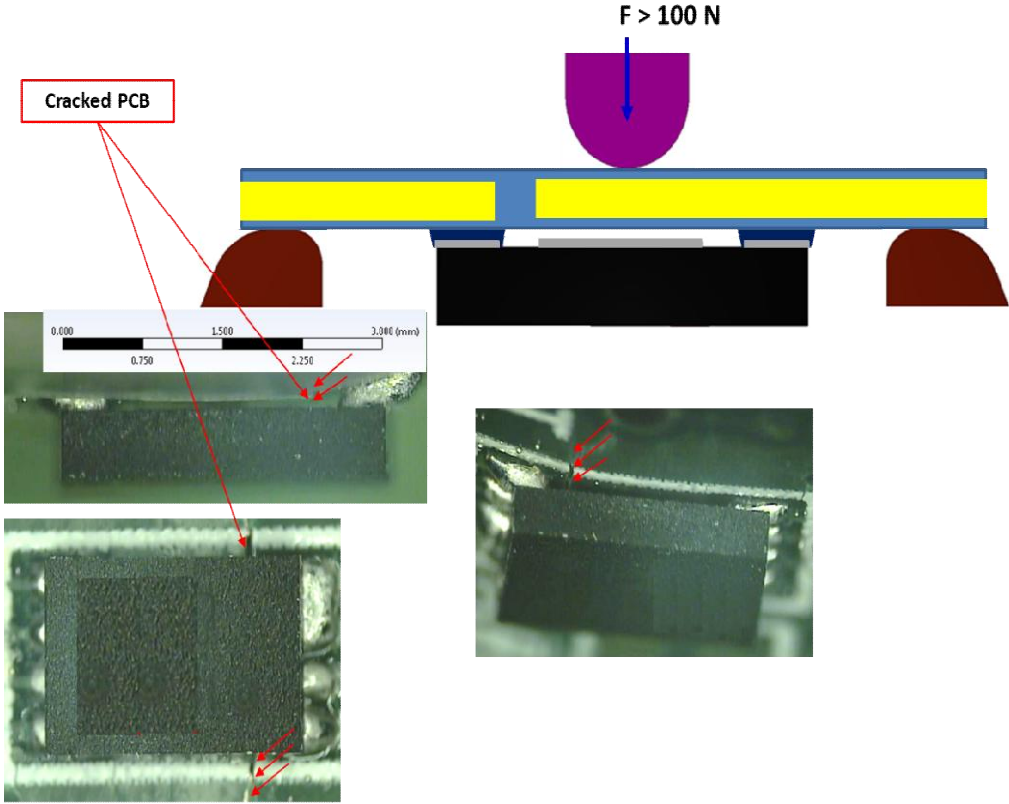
Crack signatures for the tested package soldered on PCB in Fig. 6a
